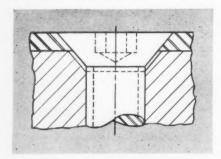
After both the pieces have been drilled and countersunk together, the thin piece is removed and then the hole in the mating part is recountersunk slightly deeper and larger in diameter as illustrated.
